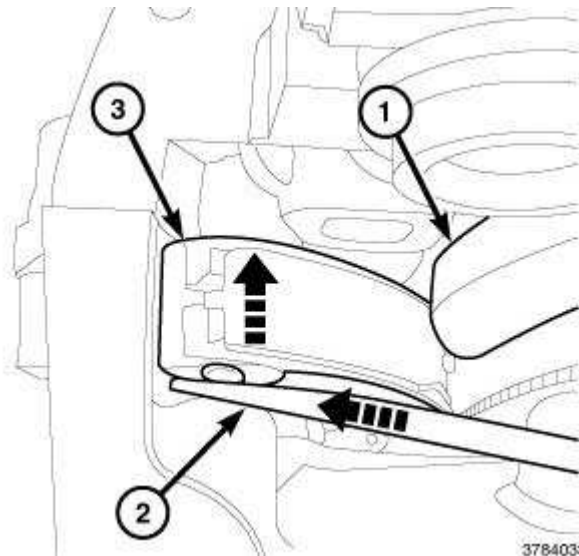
Timing Chain Holder, Trim Stick & Tensioner Arm
